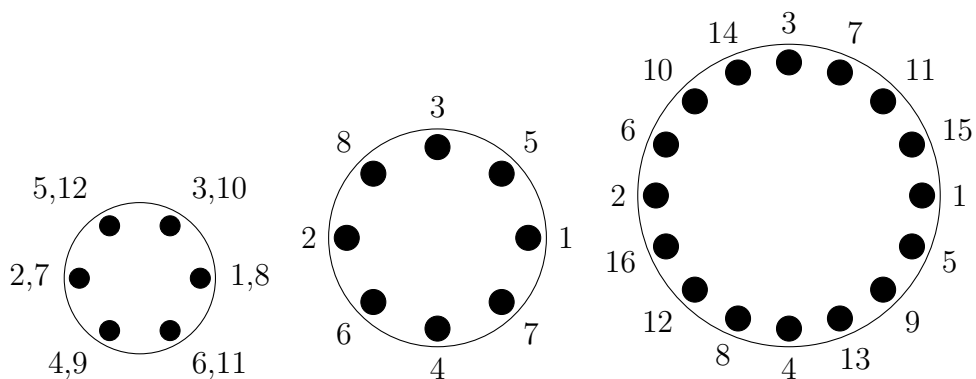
Bolt tightening patterns for the different sized flanges. 1.33/2.75, 4.5, and 6 inches from left to right.
